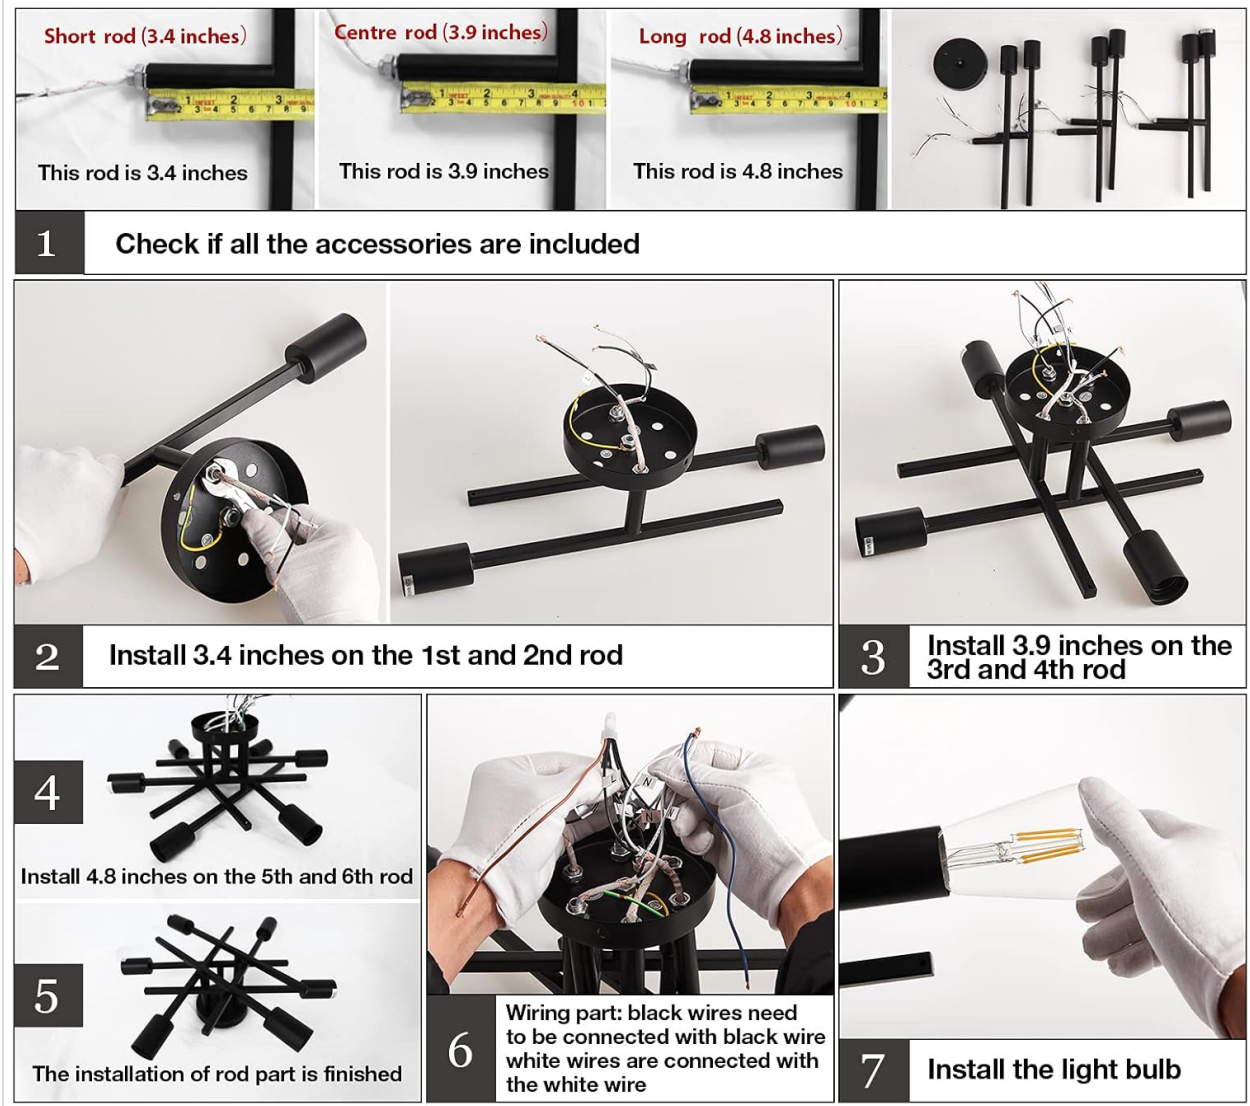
Visual guide for assembling the fixture arms according to specified lengths.
